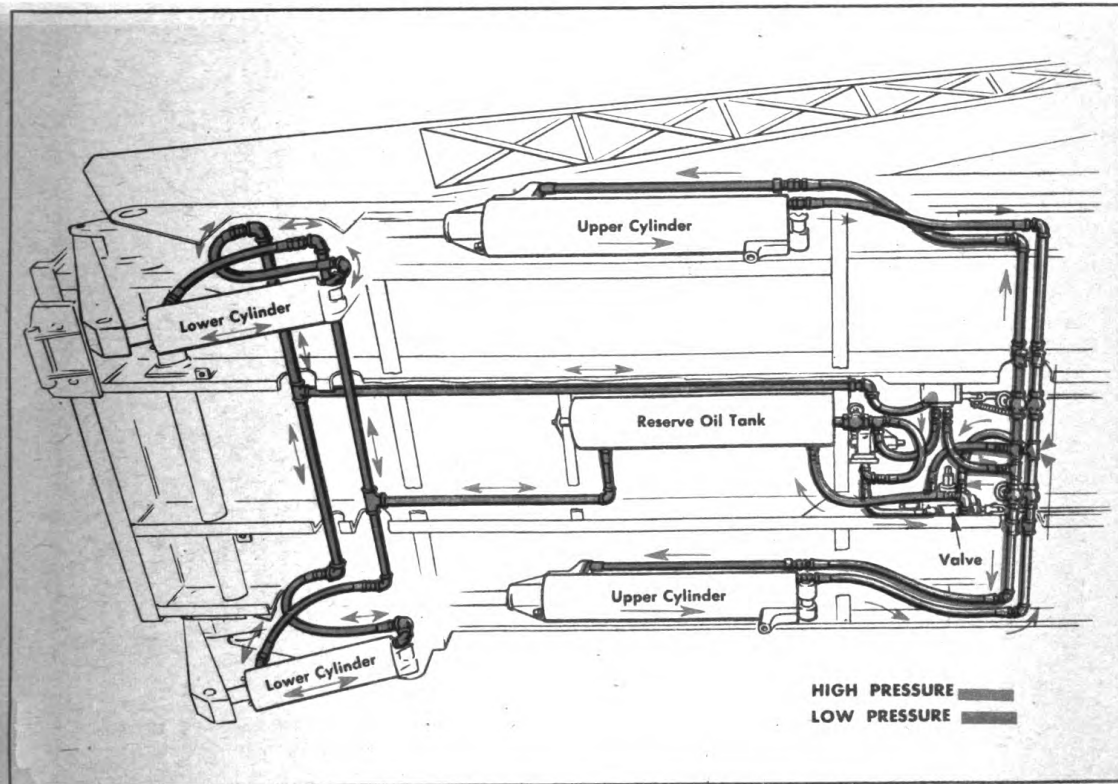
Valve Lever Toward Cab. Lower Cylinder Control Handle Pulled Toward Operator
